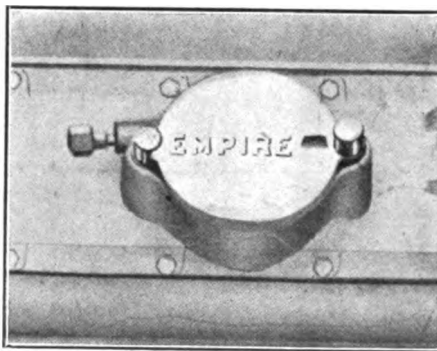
Removable handhole cover on detachable plate of upper half of crankcase
